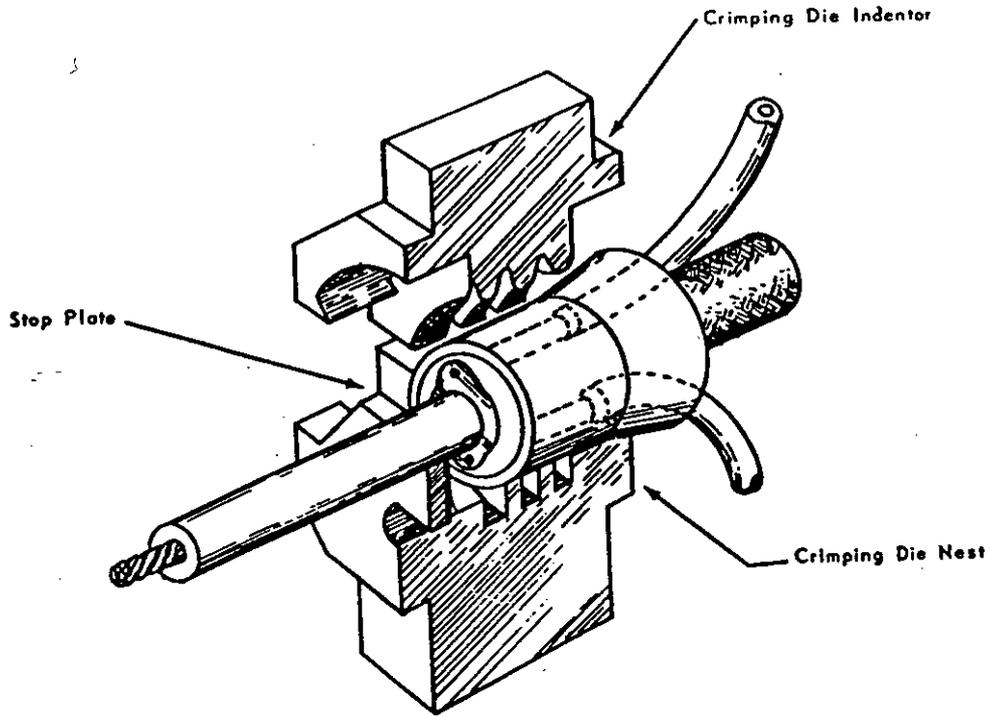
Cross section of crimping die with preassembled ferrule in crimping position.
